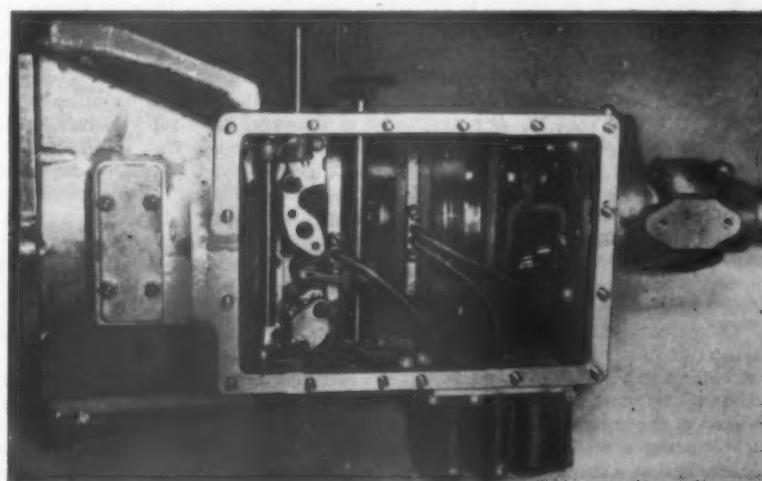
View of the underside of the Hobbs Mecha-Matic transmission with its sump removed to show the layout of the controls and the gear, clutch and brake assembly
